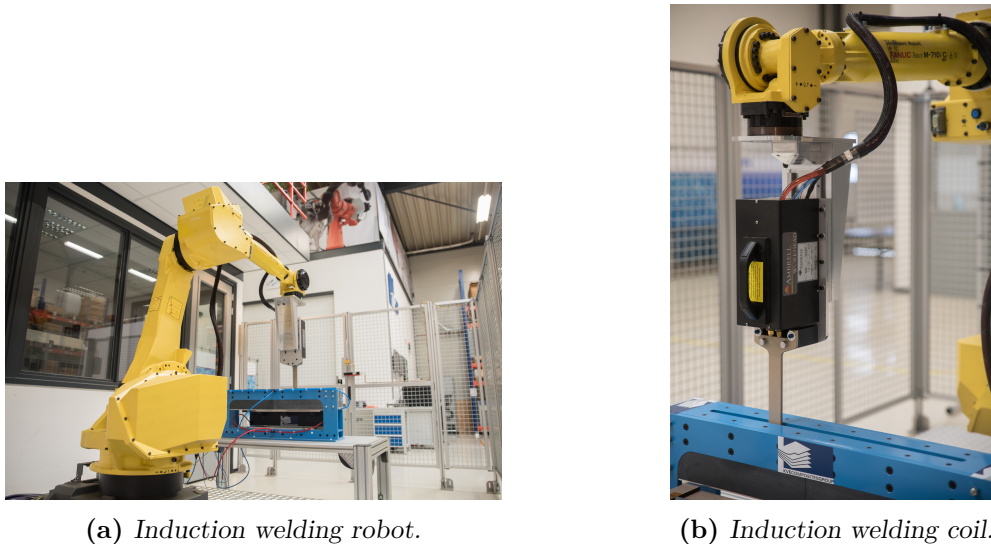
Induction welding set-up (source: TPRC).
